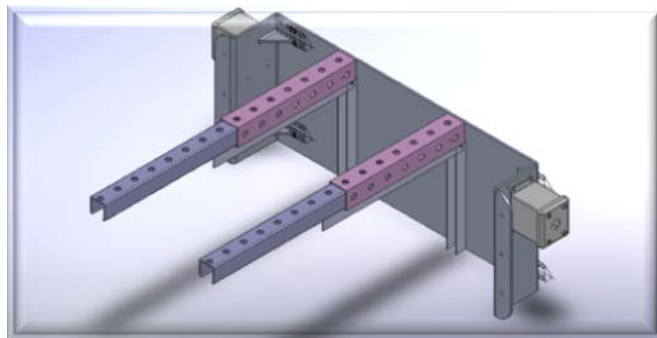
Redesign 1 - Seat Mounted on Top of Tubing
